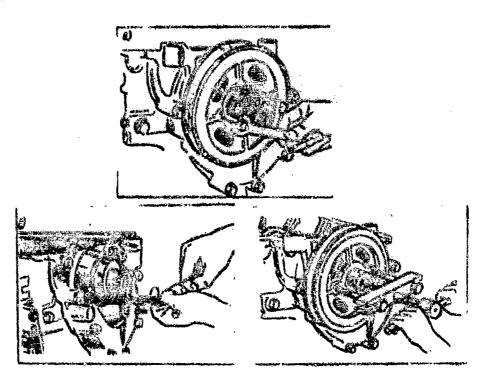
Removal of the timing gear cover: a) removal of the crankshaft pulley with pulling bolts; b) removal of the pulley with a puller c) unscrewing the cover fastening bolts
